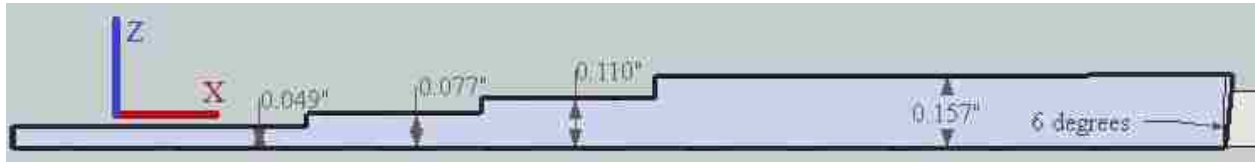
Cross sectional view of the 10x10 cm² upper trimmer lead plate in the cross-plane dimension illustrating the thickness values of the plate.
